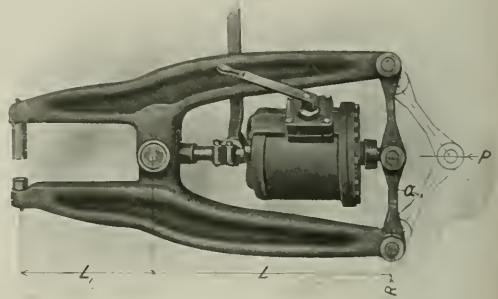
Alligator Type of Toggle-Joint Riveter.
